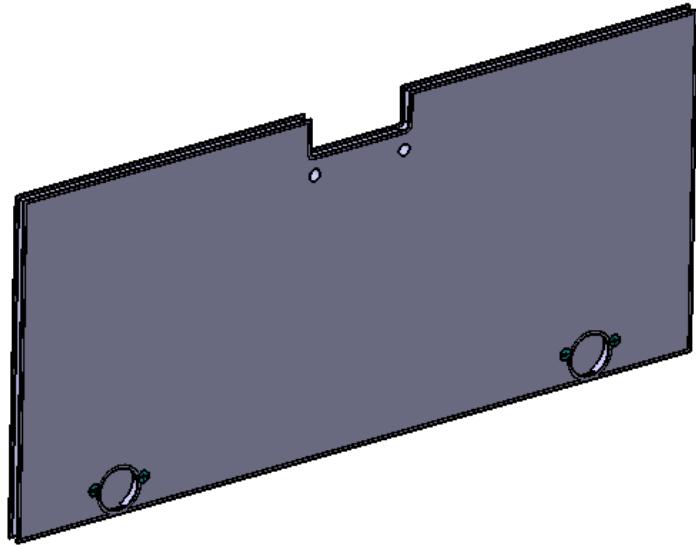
ONE-POINT LATCH CUTOUT IN FAÇADE OF EXPOSED DRAWER
